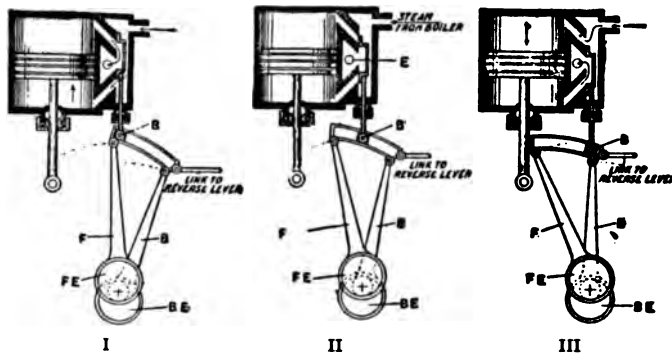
PRINCIPLE OF SLIDING GEAR AND LINK-MOTION OF THE STEAM-MOTOR.
